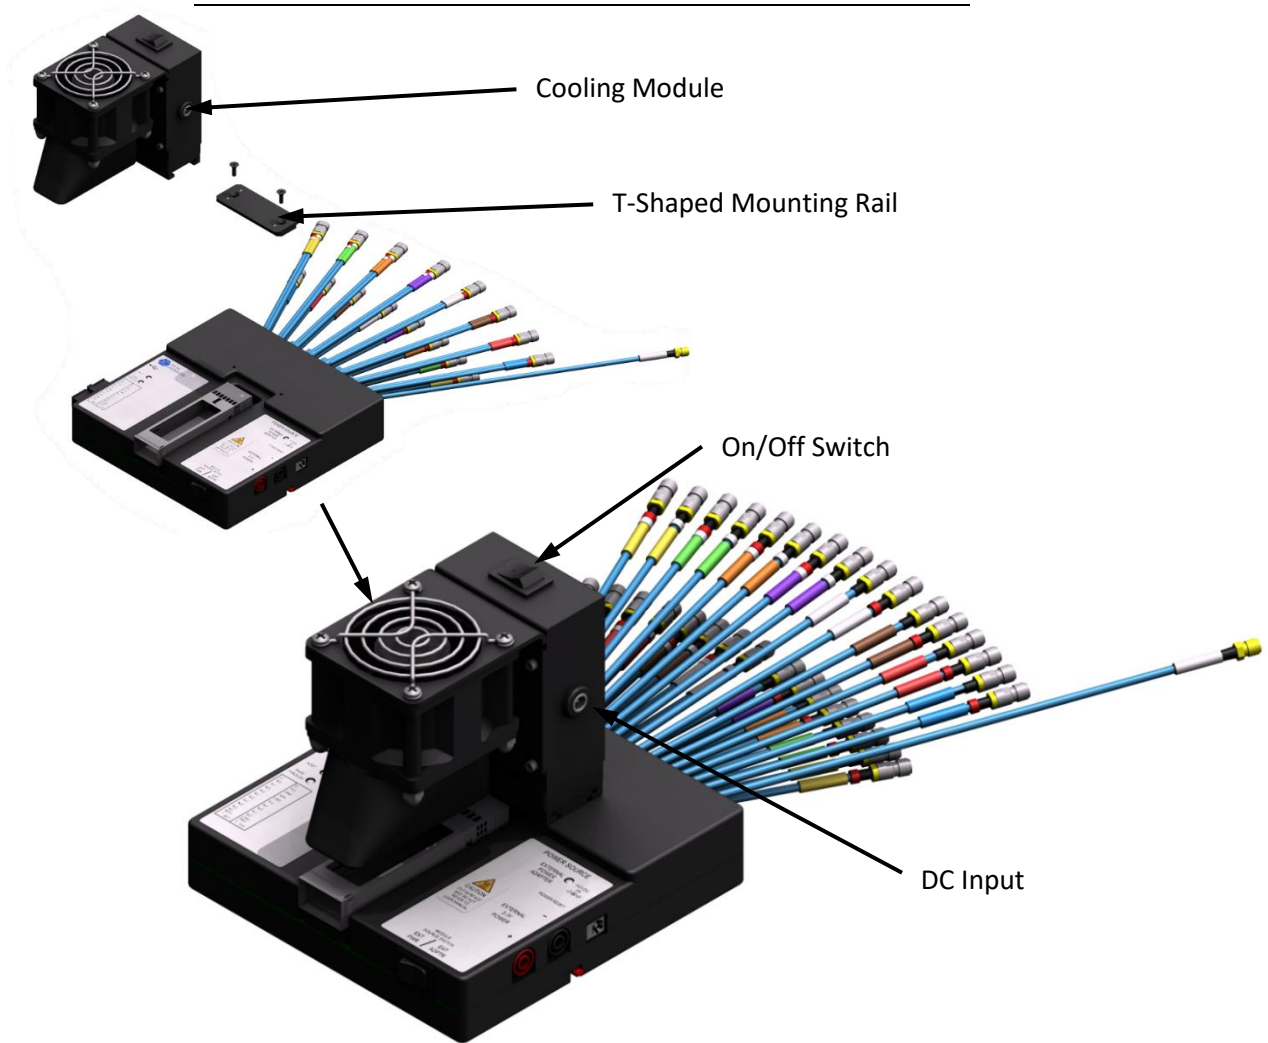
The OSFP MCB (Receptacle) Test Adapter with Cooling Module
